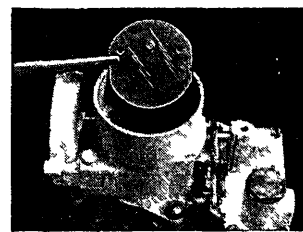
Install choke valve. Use new screw. Center valve by tapping lightly.
